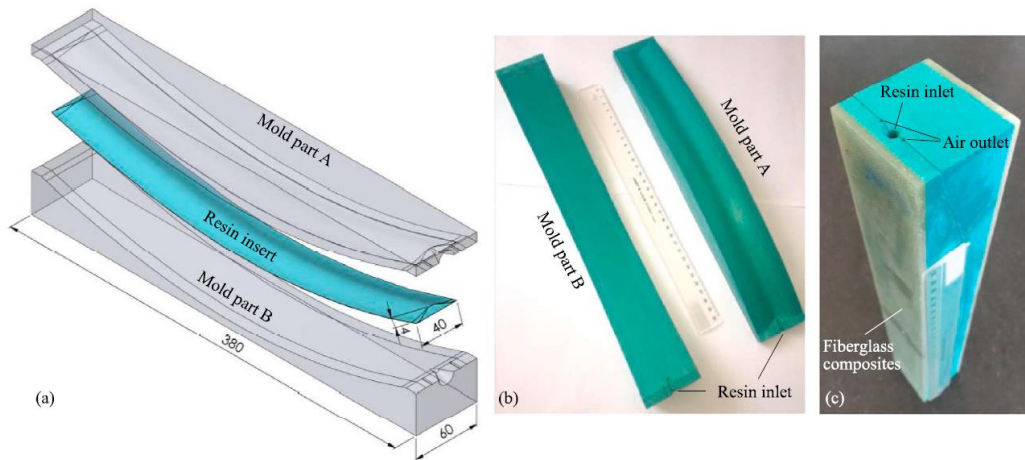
The mold tool for casting the polyester resin inserts
